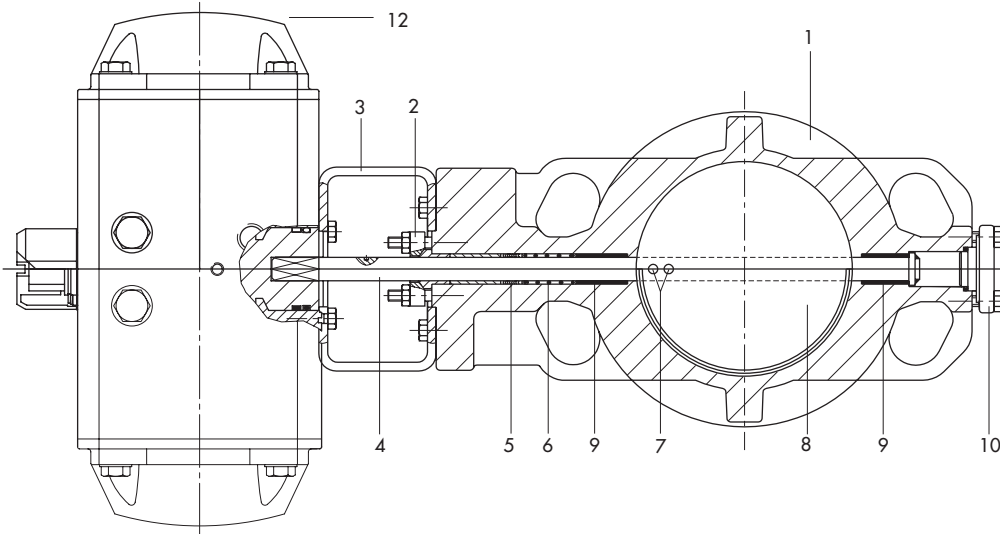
· Type 3331/BR 31a Pneumatic Control Butterfly Valve
